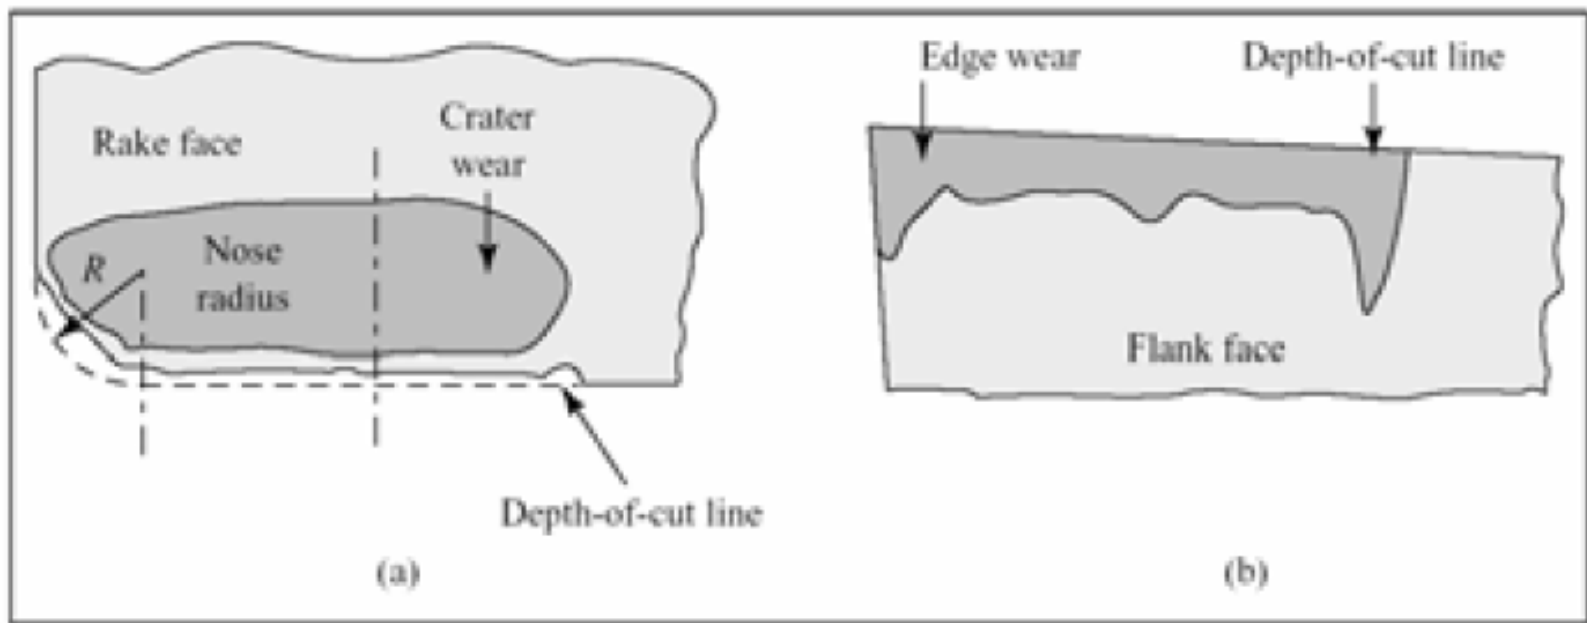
Carbide insert wear patterns: (a) crater wear, (b) edge wear.
